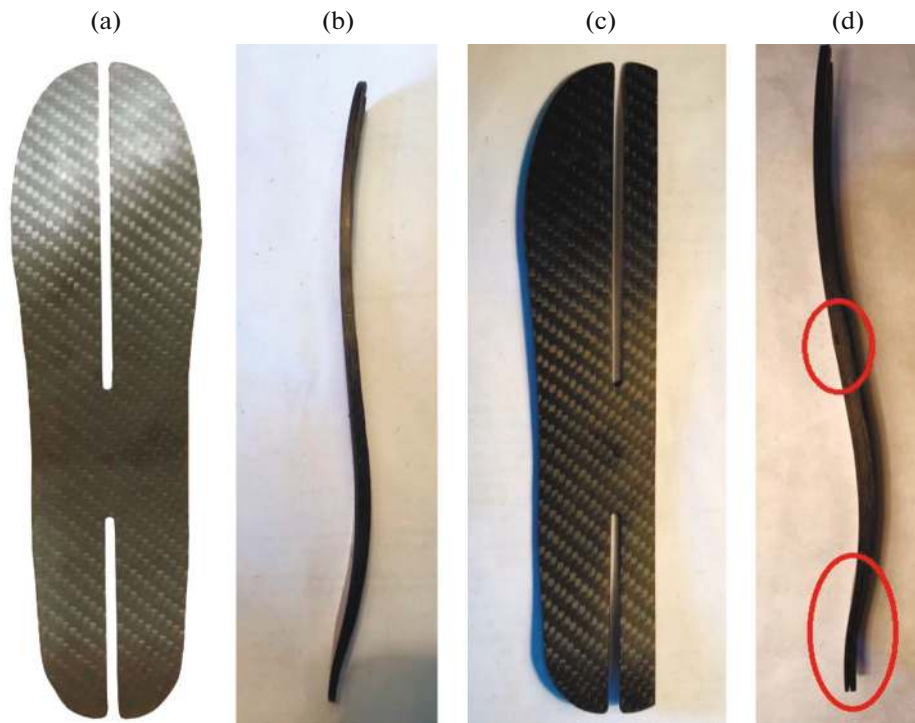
(a) Image of a sample after a fracture with visually indistinguishable defects (top view); (b) image of a sample after a fracture with visually indistinguishable defects (side view); (c) image of the sample after fracture with visually distinguishable defects (top view); (d) image of the sample after fracture with visually distinguishable defects (side view).
